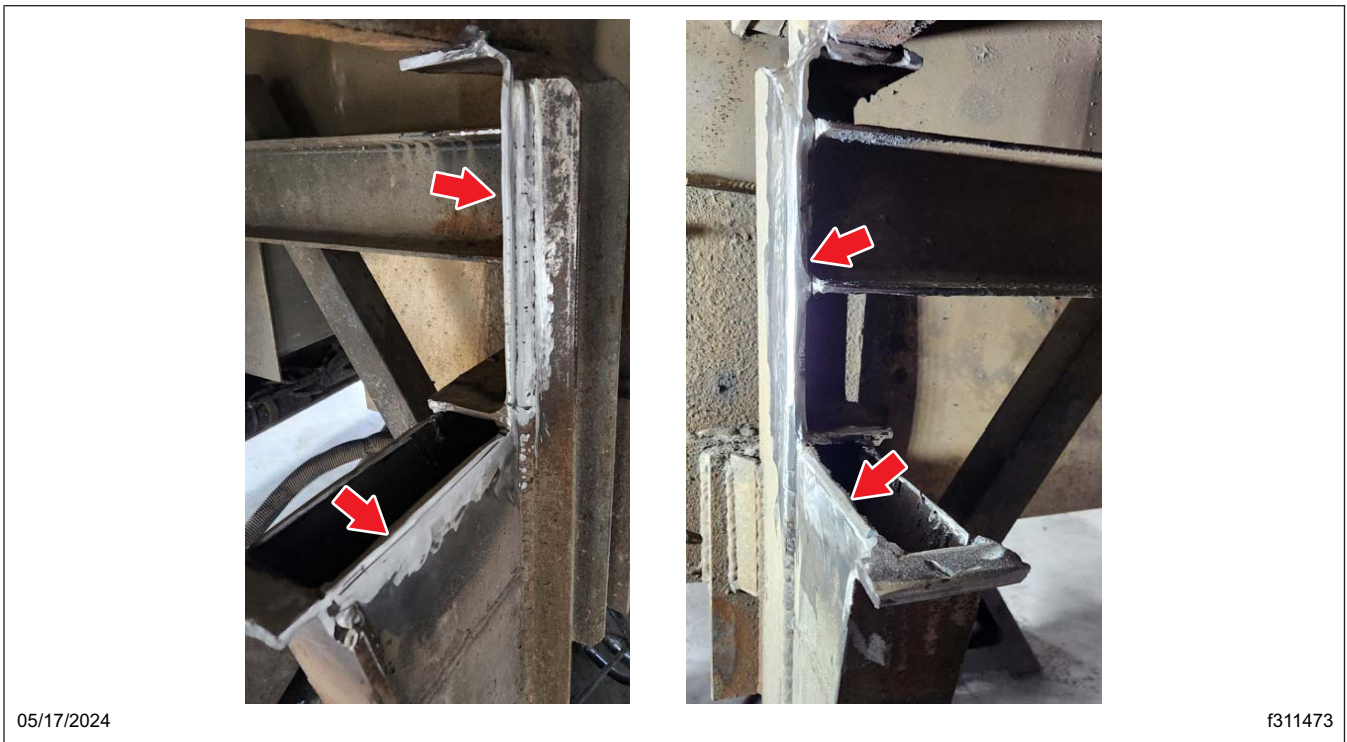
, Old Weld Cleaned and Prepared for the New Frame Rail Installation
